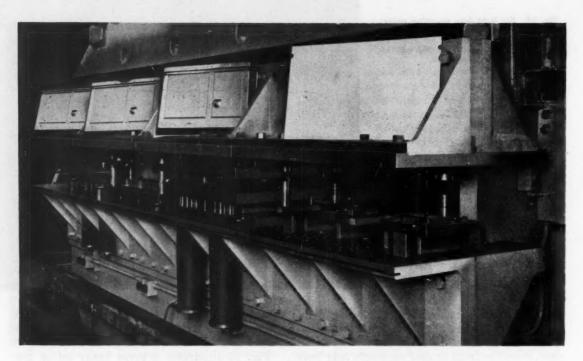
Press brake set-up for drawing and punching the top of refrigerator inner liner. Parts produced in each die are shown on the front ram extension.
